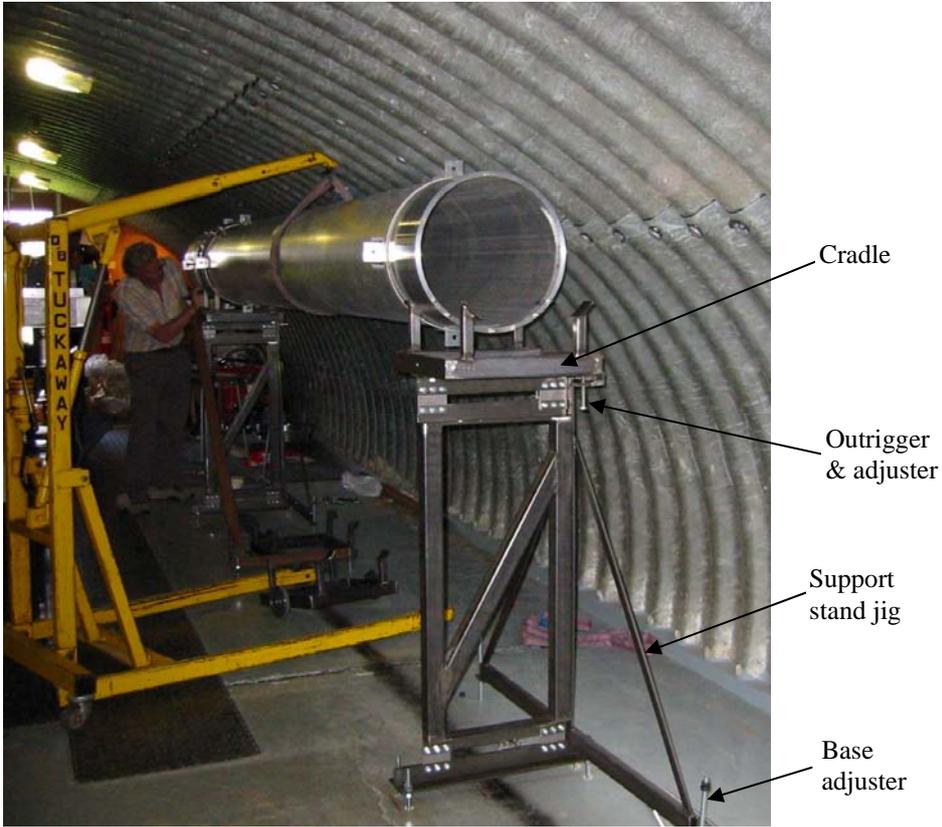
Photograph of a pipe being positioned on a cradle with the support stand jig applied to the support stand to stabilize both the stand and the cradle.
